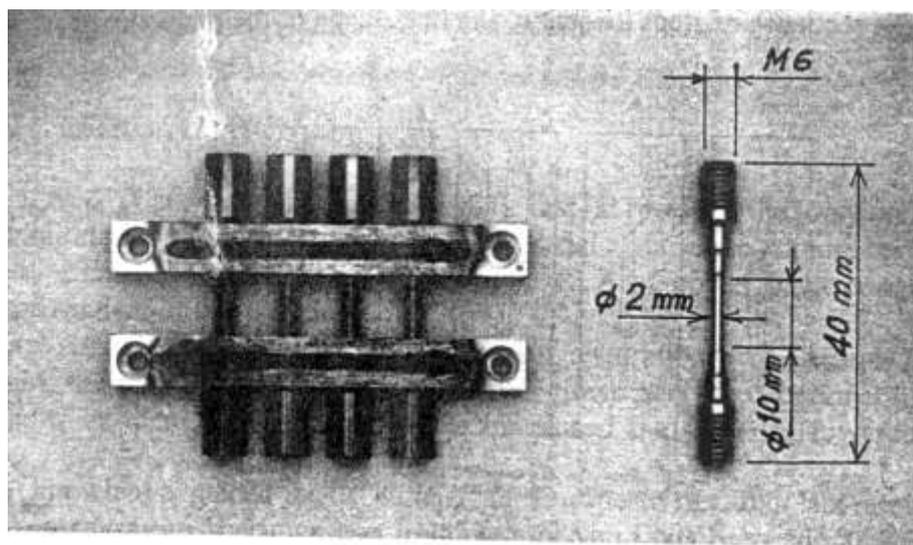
Weld-extended miniature specimens presented in ref. 2
